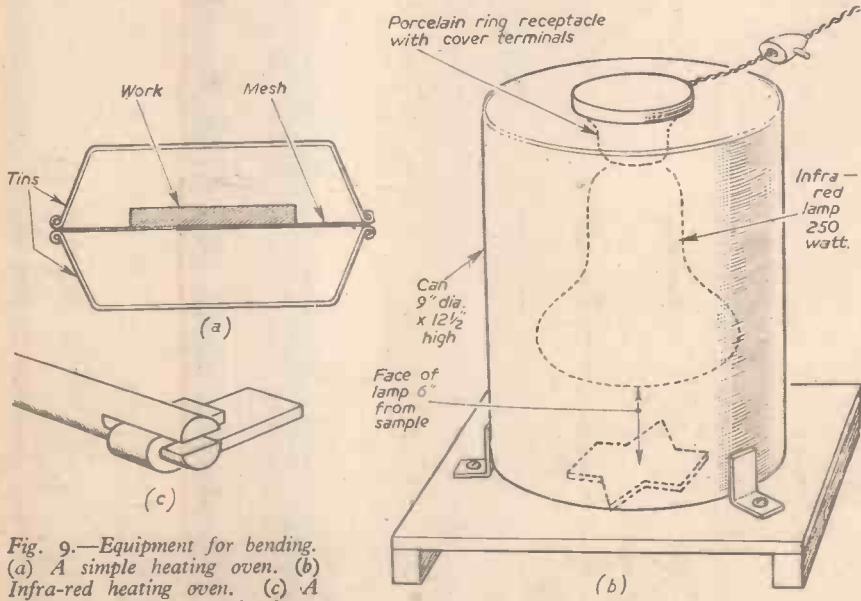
Equipment for bending. (a) A simple heating oven. (b) Infra-red heating oven. (c) A simple tool for sharp bends.
